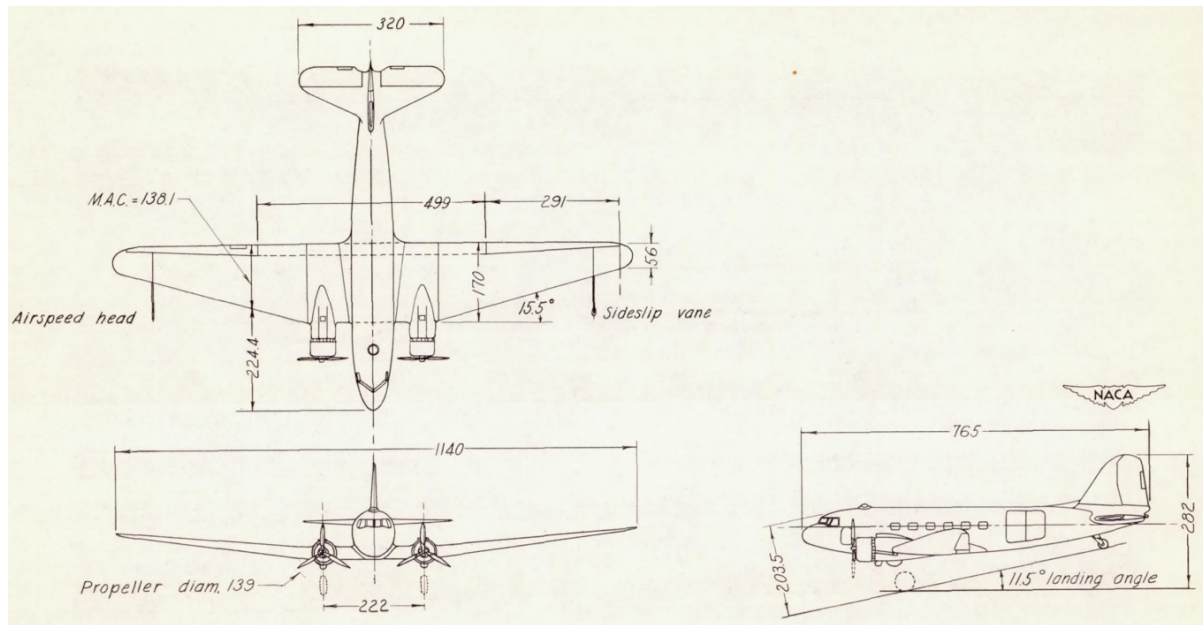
Three-view drawing of a Douglas DC-3. All dimensions in inches [3].
